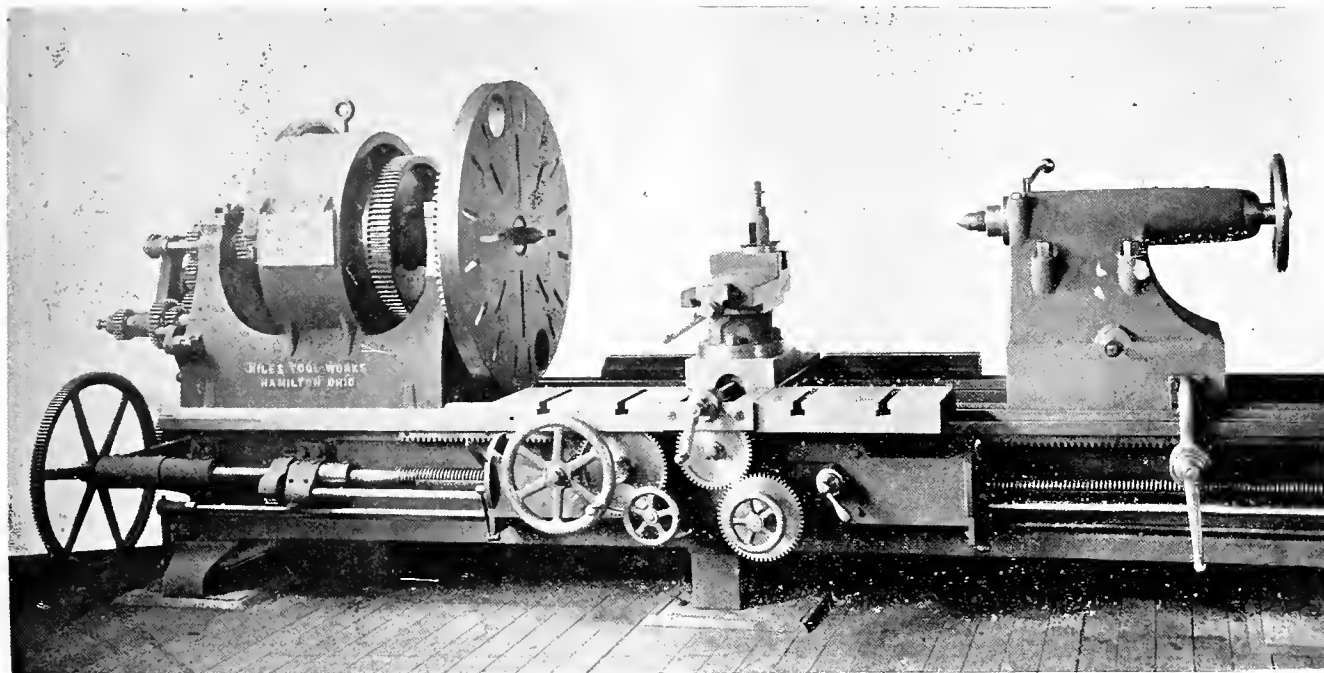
A Card Motor, direct connected to a Niles forty-six-inch Lathe.
